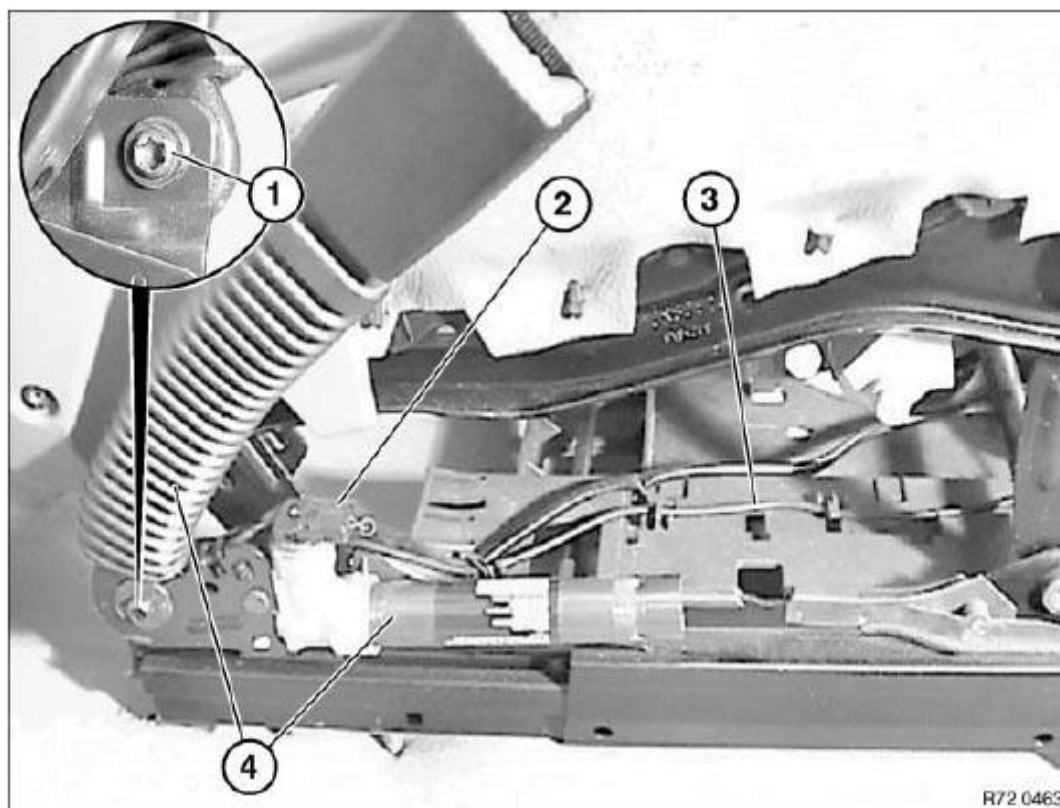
Identifying Screw, Plug Connection, Lead And Lower Strap (Belt Tensioner)
